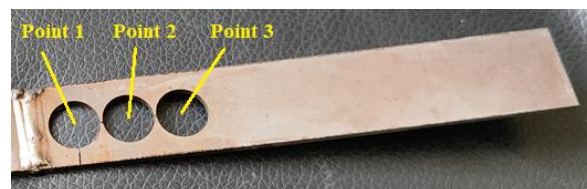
Specimen preparation via wire-cut, showing sampling locations relative to the weld line. Three 11 mm-diameter circular specimens were extracted from each welded specimen at progressively increasing distances from the weld line: 13 mm (Point 1, closest), 26 mm (Point 2, intermediate), and 39 mm (Point 3, farthest).
